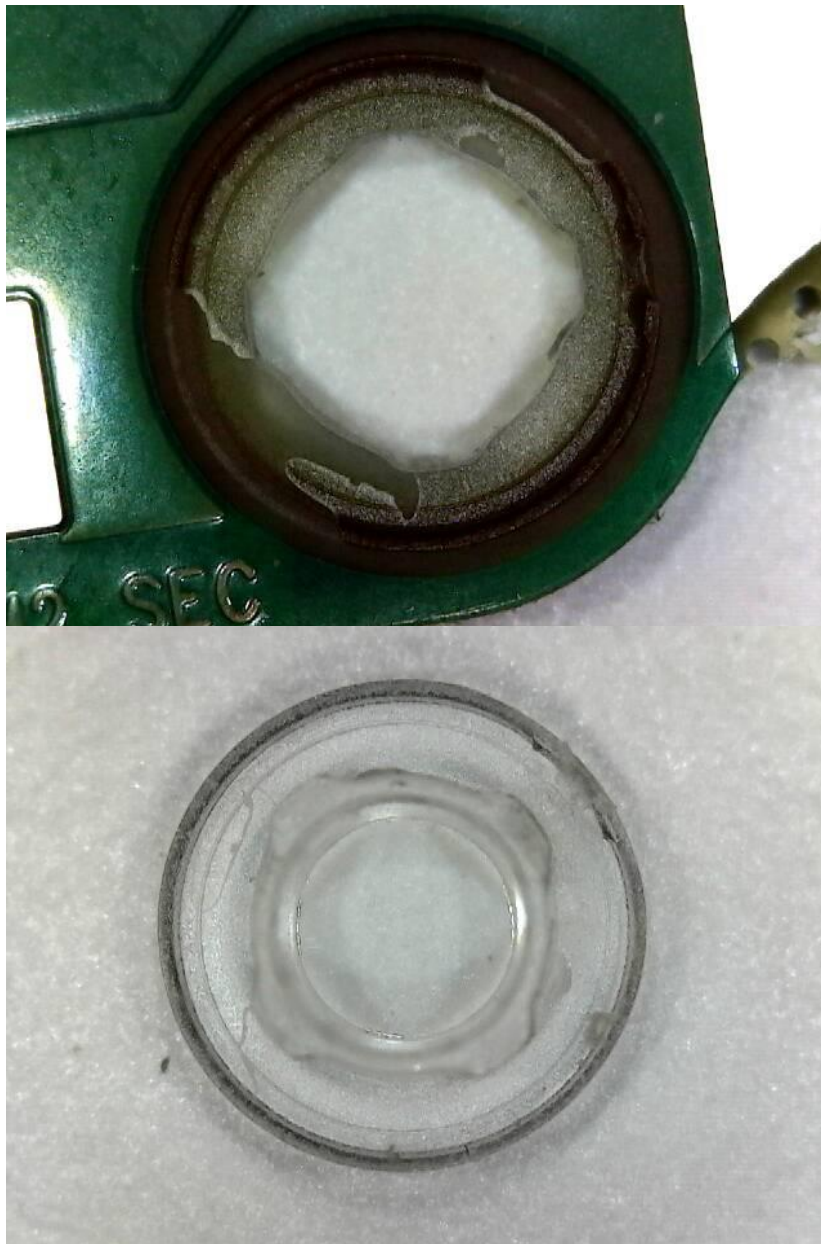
Images of INSERT and PCB RAW with a push-out force of 206,7 N. It can be seen that the adhesive have wet the PCB well and there is rests of the adhesive on the PCB. The break is hence inside the adhesive and is considered a cohesive break. Adhesive: Dymax OP 67.
